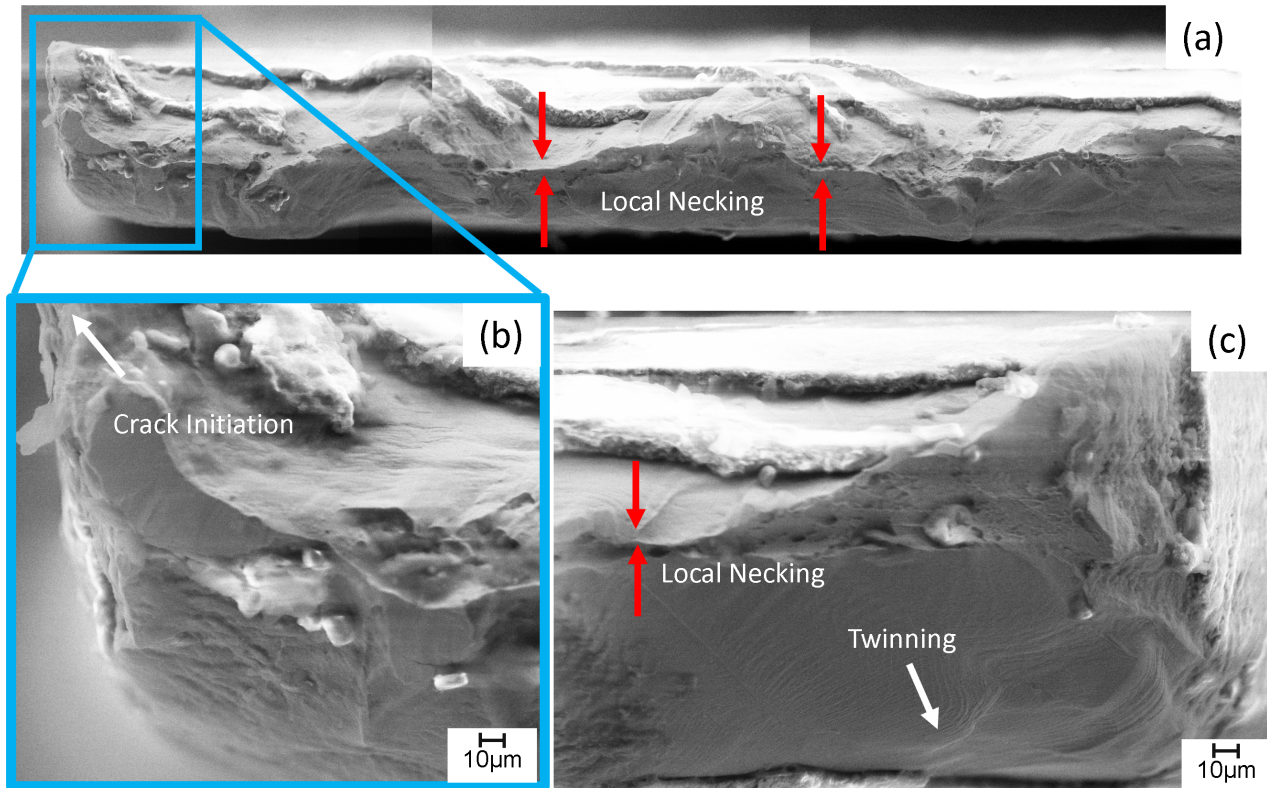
Fracture surface of high temperature quasi-static tested single sheet (a) fatigue damage zone showing some severe thinning (b) crack initiation zone (c) other side of fracture surface showing some deformation twinning and severe thinning
